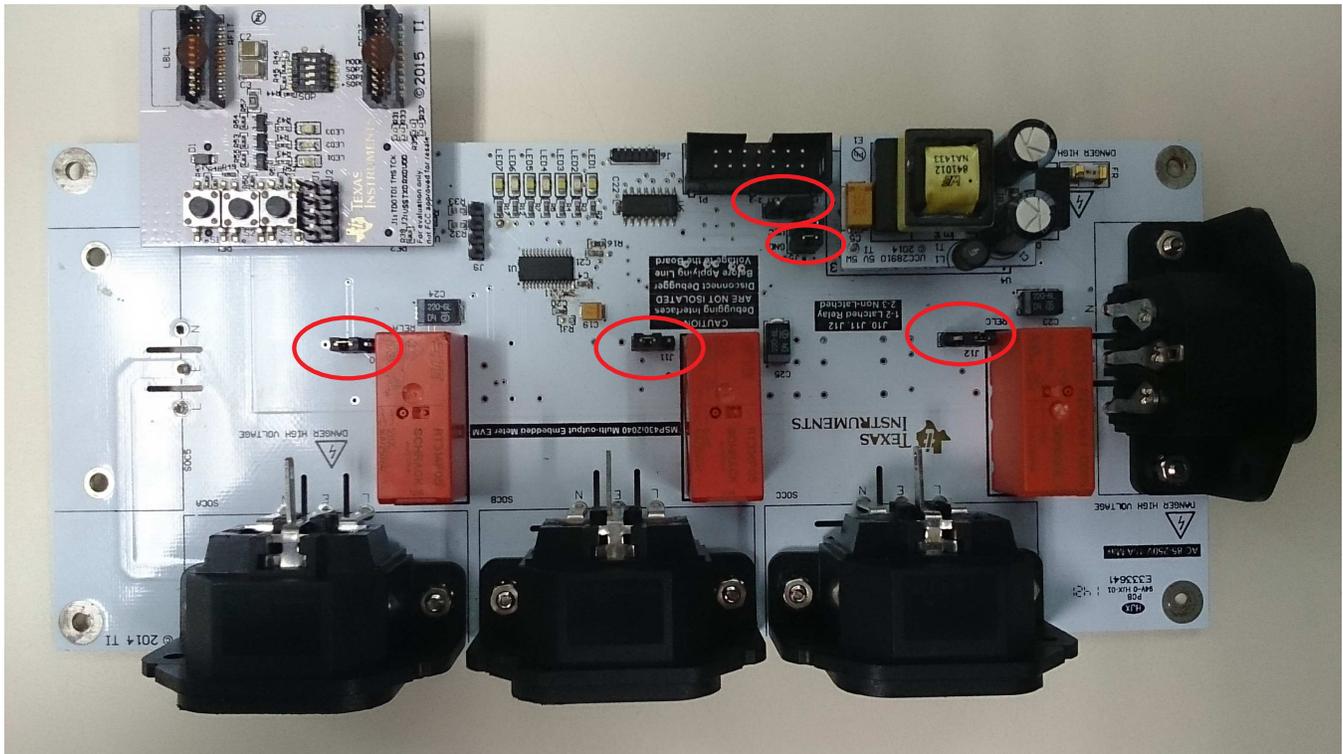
TIDM-3OUTSMTSTRP Board Jumper Settings
